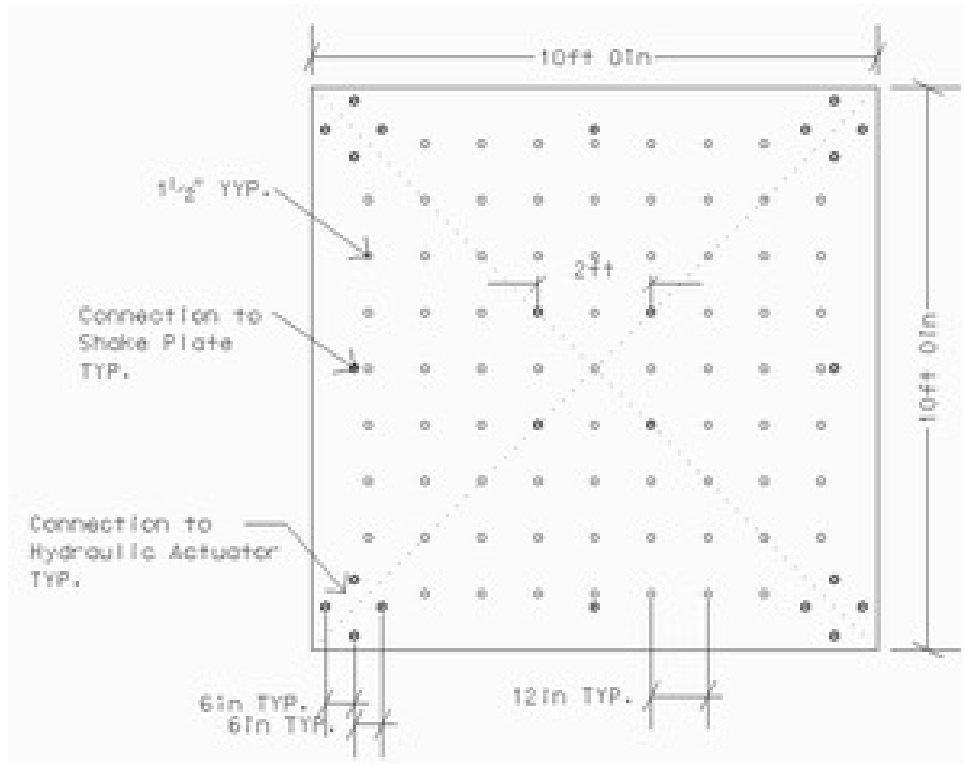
Layout of Holes on Second Testing Platform Extension of Shake Table
